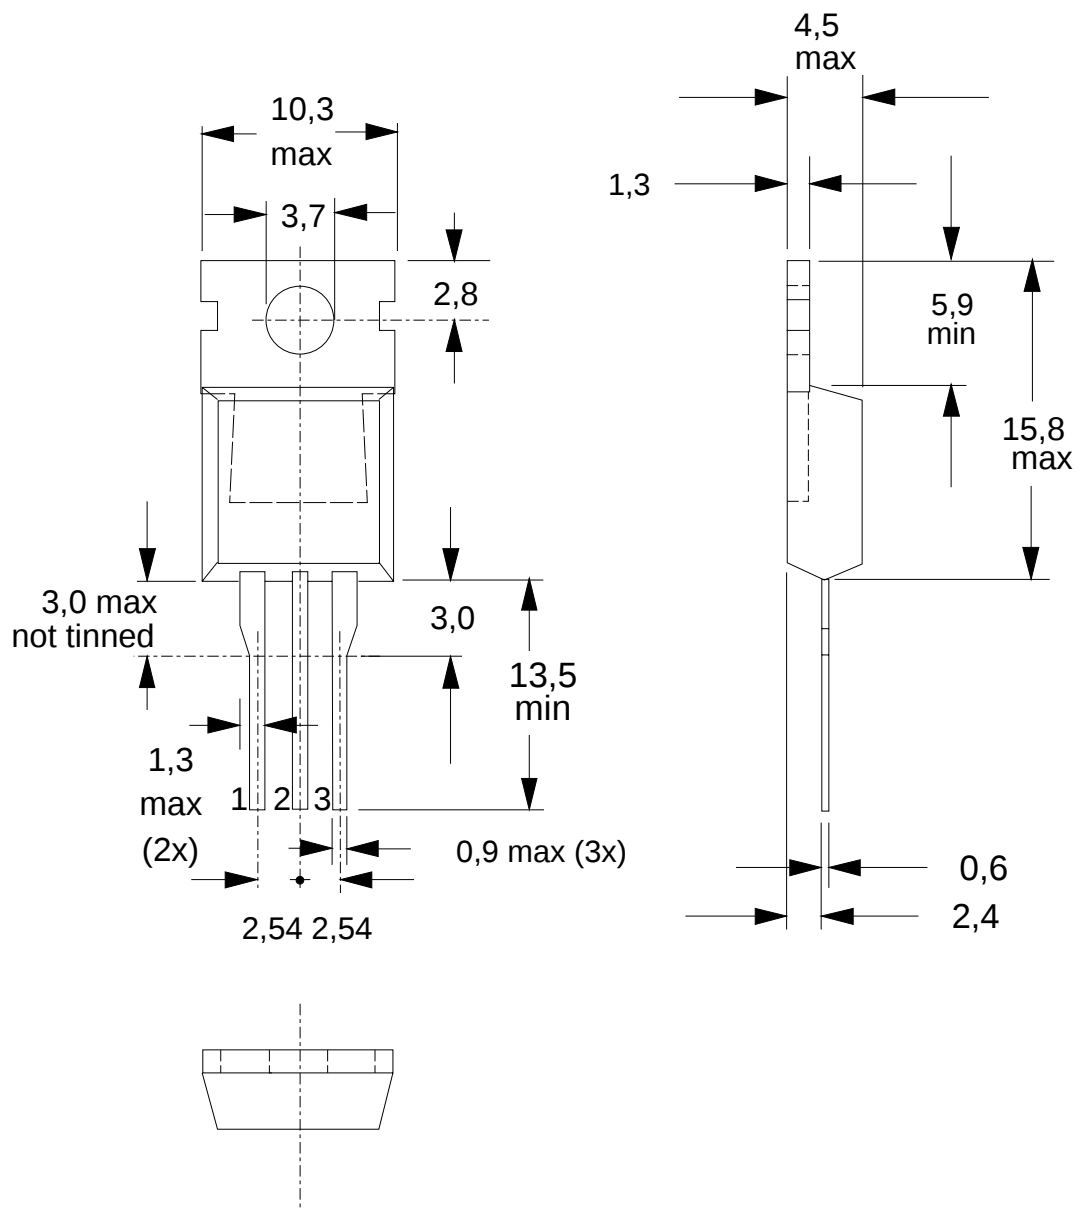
SOT78 (TO220AB); pin 2 connected to mounting base.
